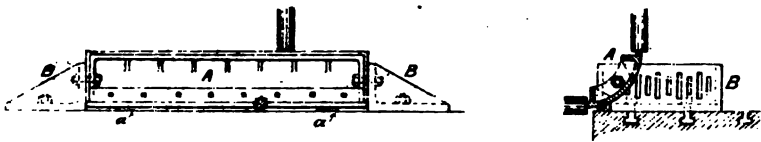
Corner Tank Plate, having Joint Faces tooled with End Mills while Clamped, and adjusted between Angle Plates.
